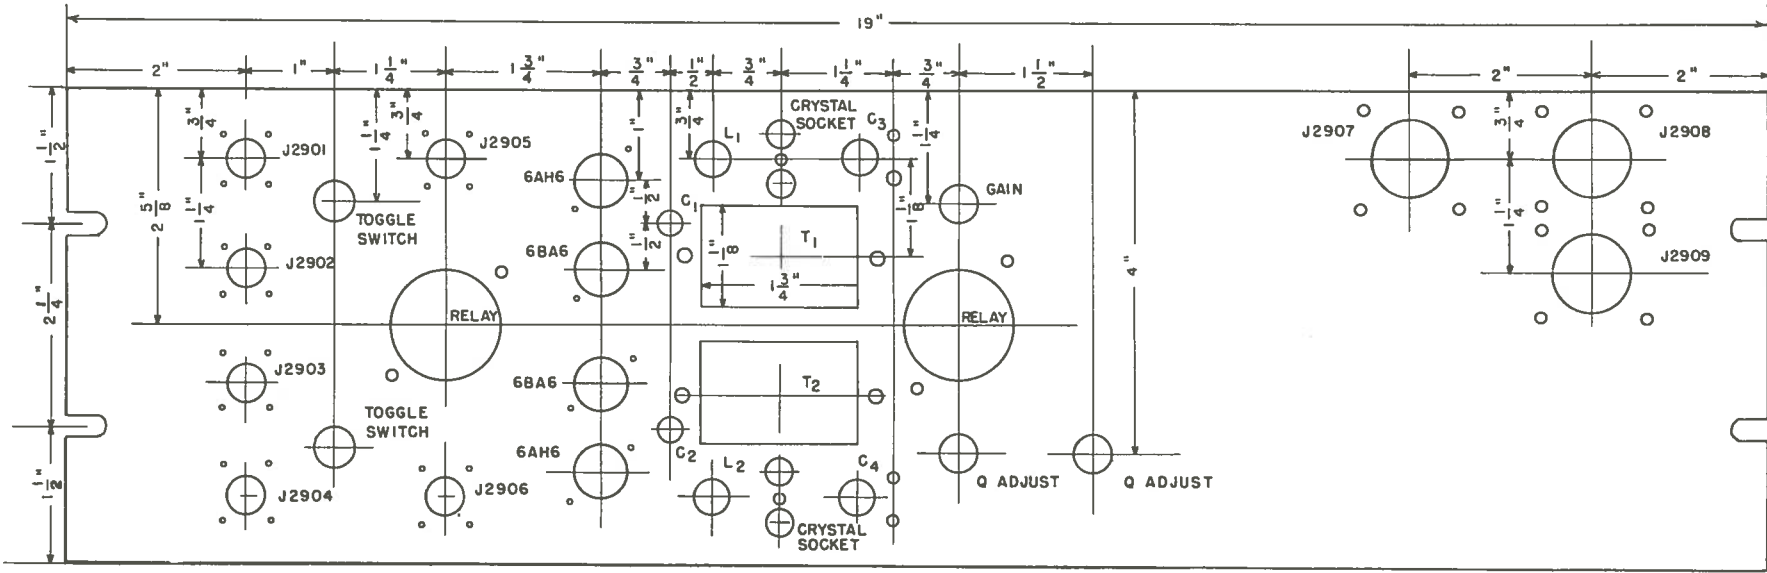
SUGGESTED CHASSIS LAYOUT OF FILTER UNIT
